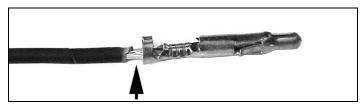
Poor Crimp; too much wire stripped; insulation not retained by outside tabs
